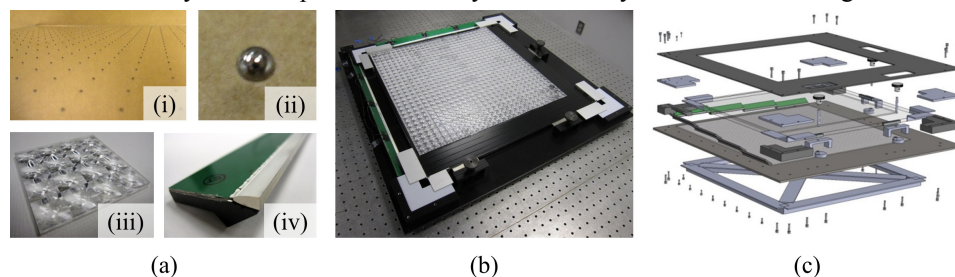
(a) System components: (i) waveguide, (ii) ball-bearing extraction feature, (iii) lenses, and (iv) PCB, LEDs, and CPC coupler; (b) assembled system (shown without cover); and (c) exploded CAD model.
